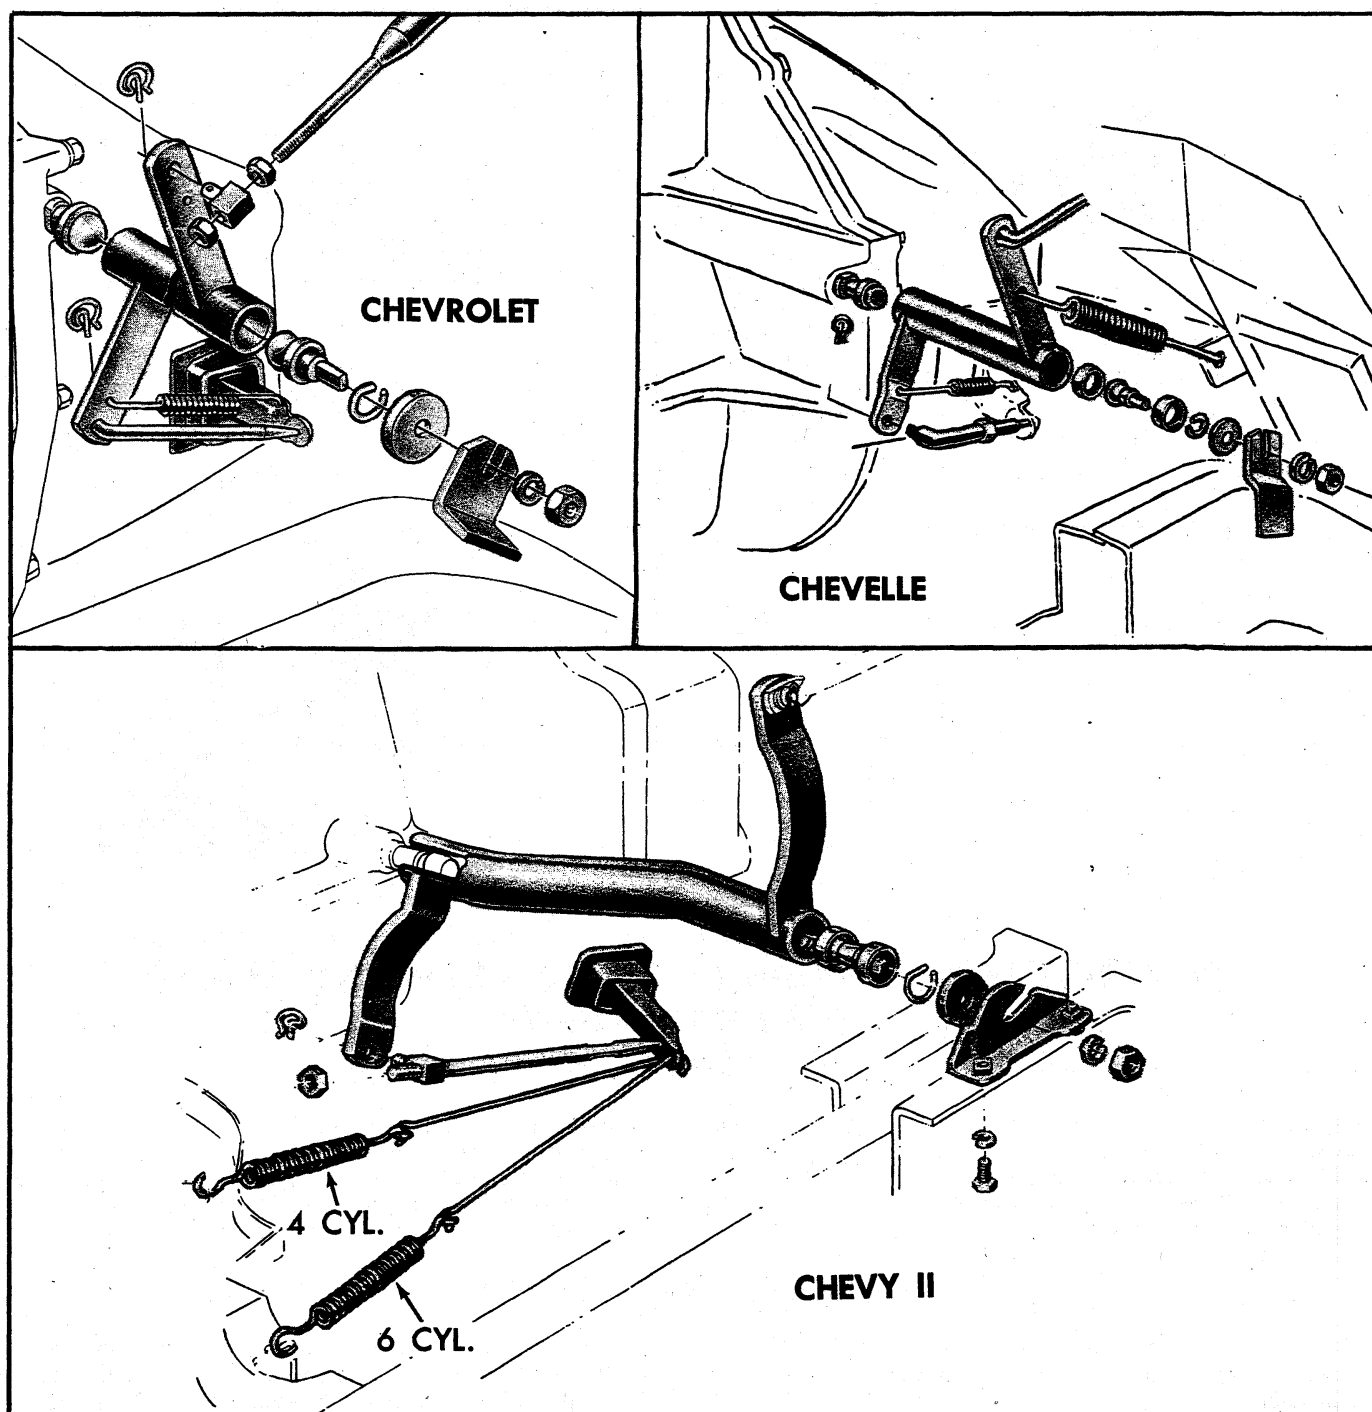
Lower Linkage Details (Chevrolet, Chevelle & Chevy II)
